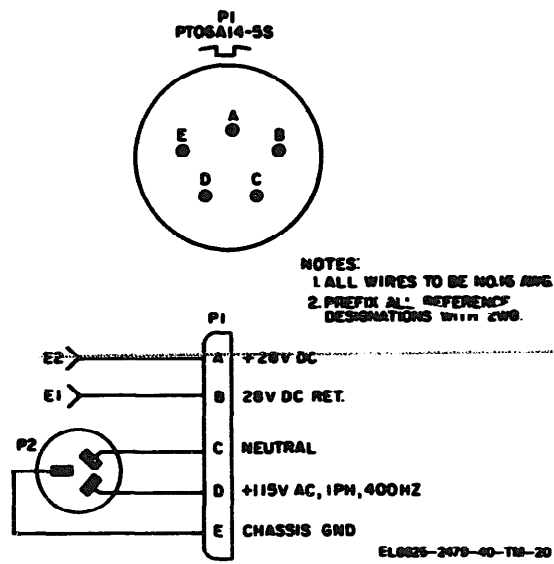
Cable Assembly, Power, Electrical, Branched CX-12724/AYM-8, wiring diagram.
